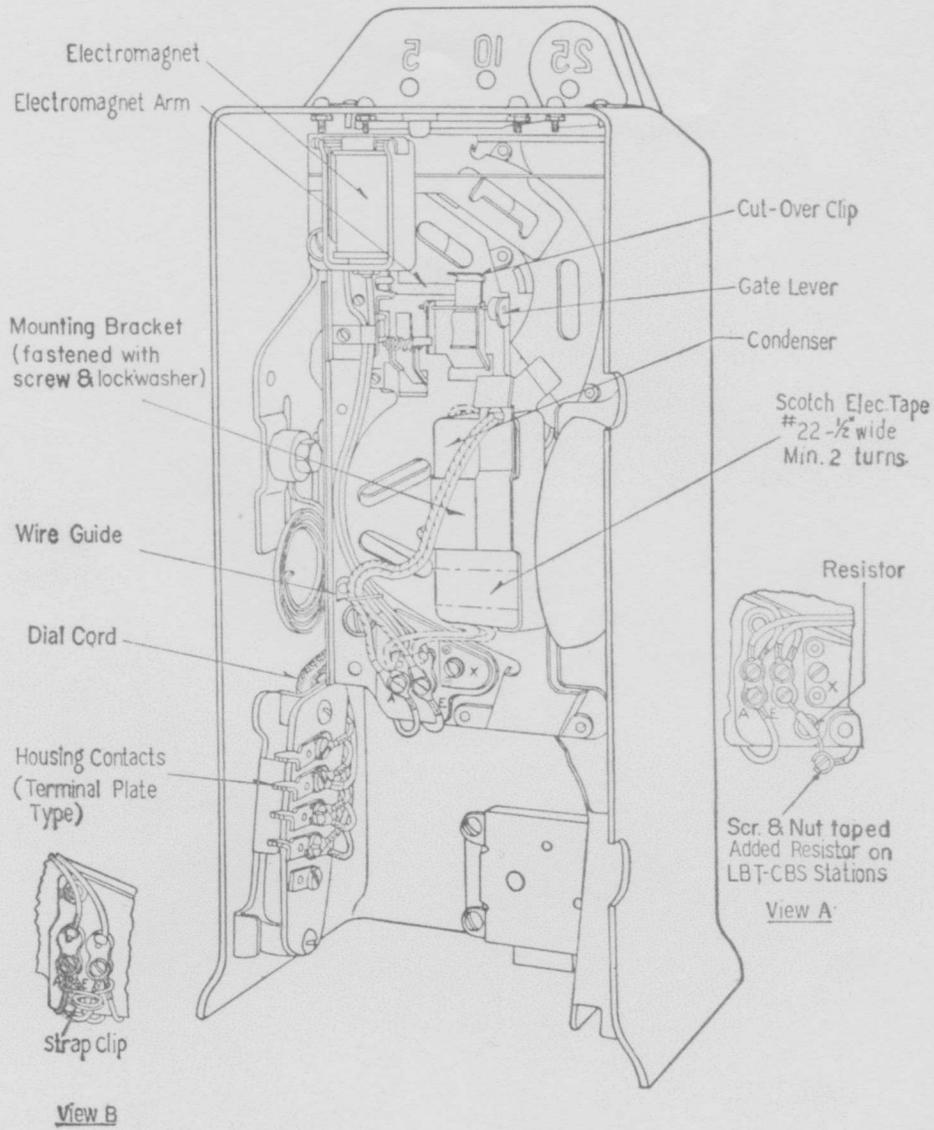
166 or 168-type, or D-178875 Coin Collector—Upper Housing
